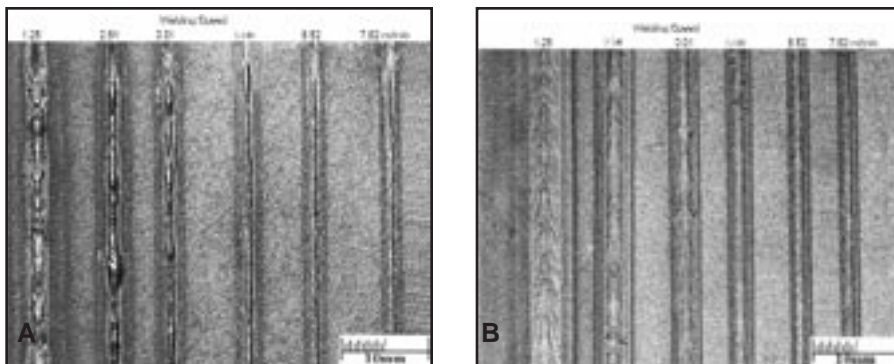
Partial-penetration, bead-on-plate steel welds (1045 steel, CO₂ laser, 6 kW, welding speeds of 1.25 to 7.62 m/min). A — Single-beam laser welds; B — dual-beam laser welds.
